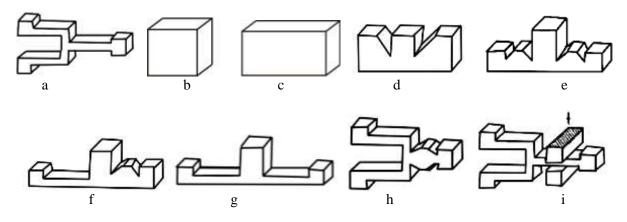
Technological process of manufacturing of a lever with a jaw: a – article; b – billet; c, f, g - drawing; d, e, h - necking; i - bending and necking
